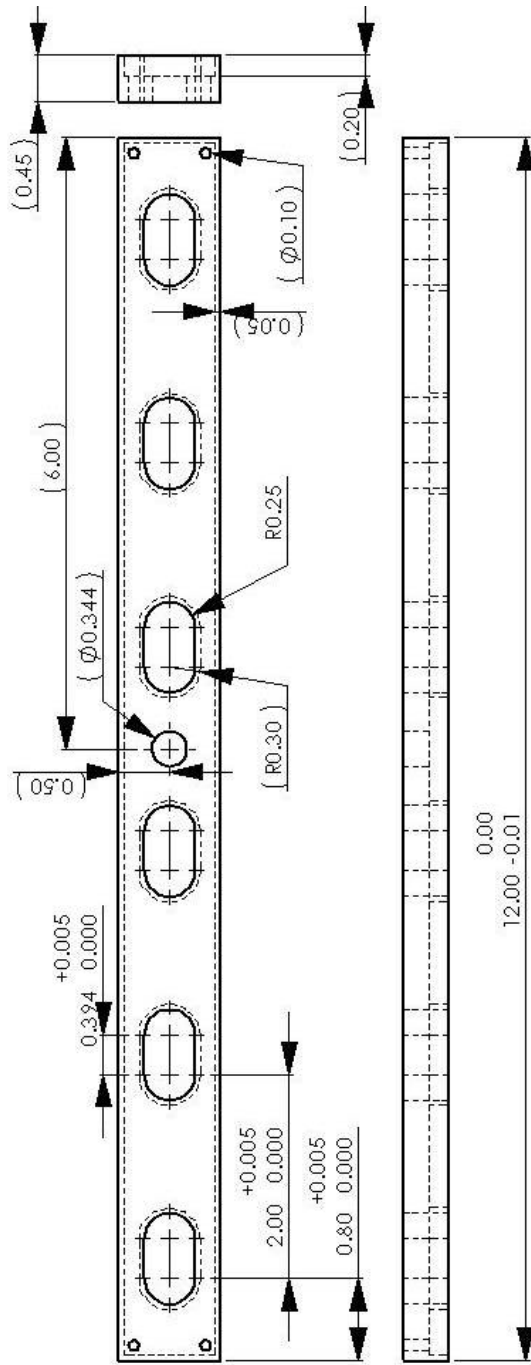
Engineering drawing for blockage configuration 2 (Third angle projection)
